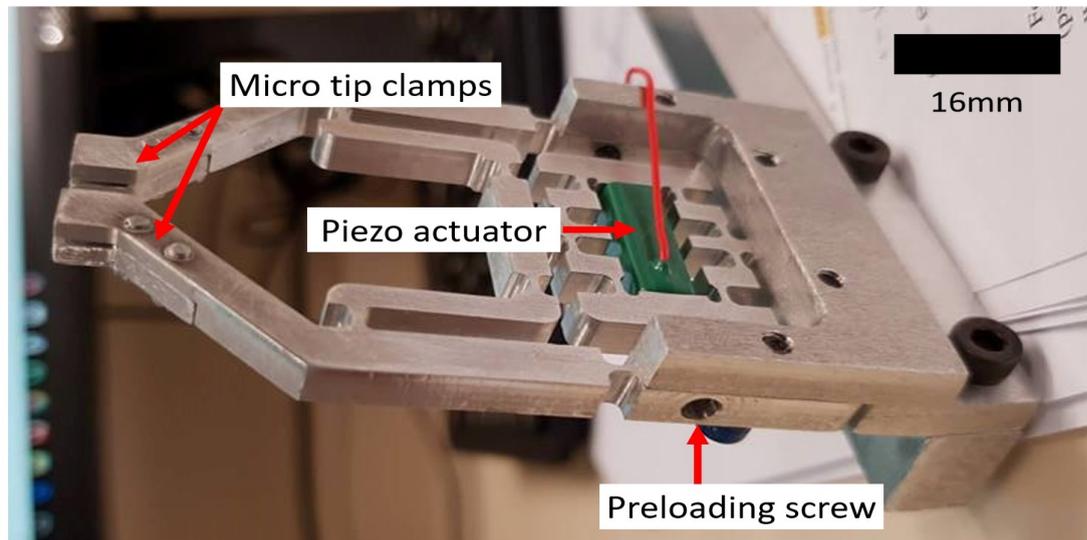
The CNC machined aluminium compliant base gripper with piezo actuator and micro gripper clamps
